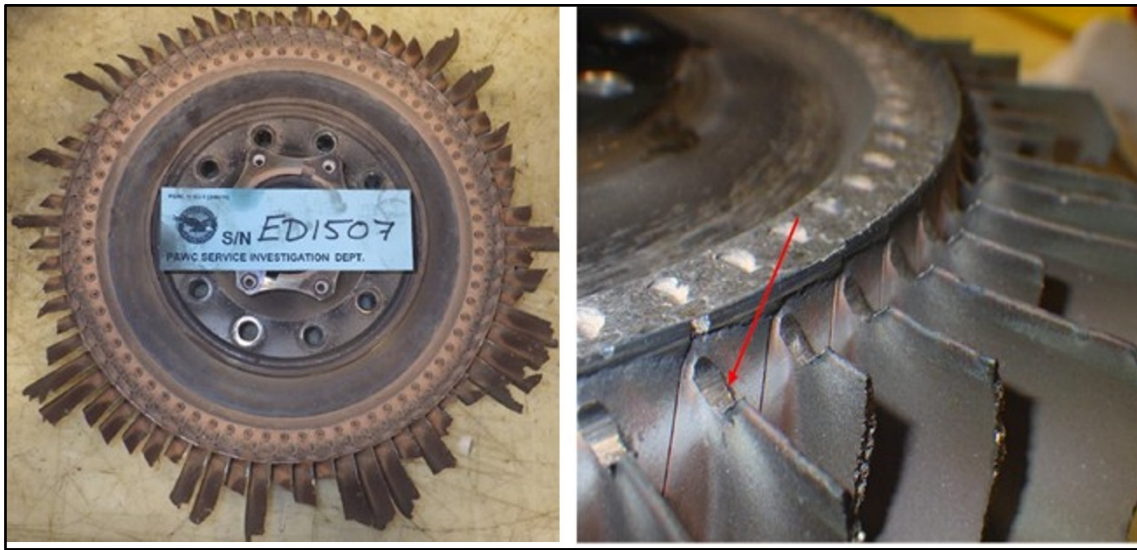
2nd Stage PT Disc Assembly and Impact Disc
